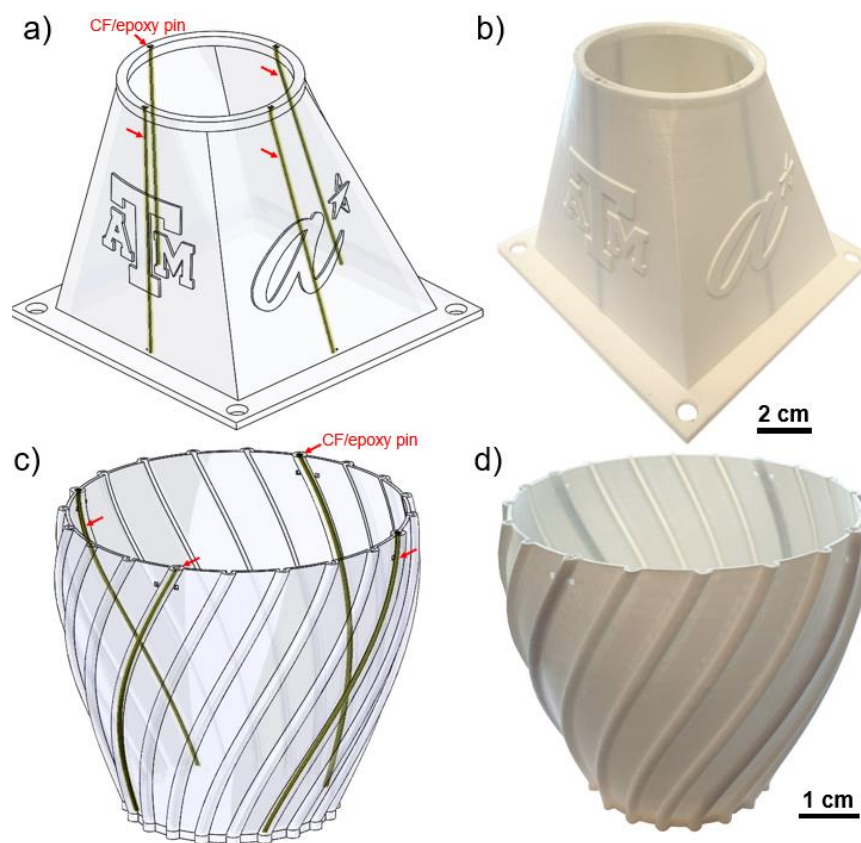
Complex printed structures reinforced with molded Z-pins: CAD model (a) and printed part (b) of a duct adaptor reinforced with molded Z-pins; CAD model (c) and printed part (d) of a hanging pot reinforced with molded Z-pin.
